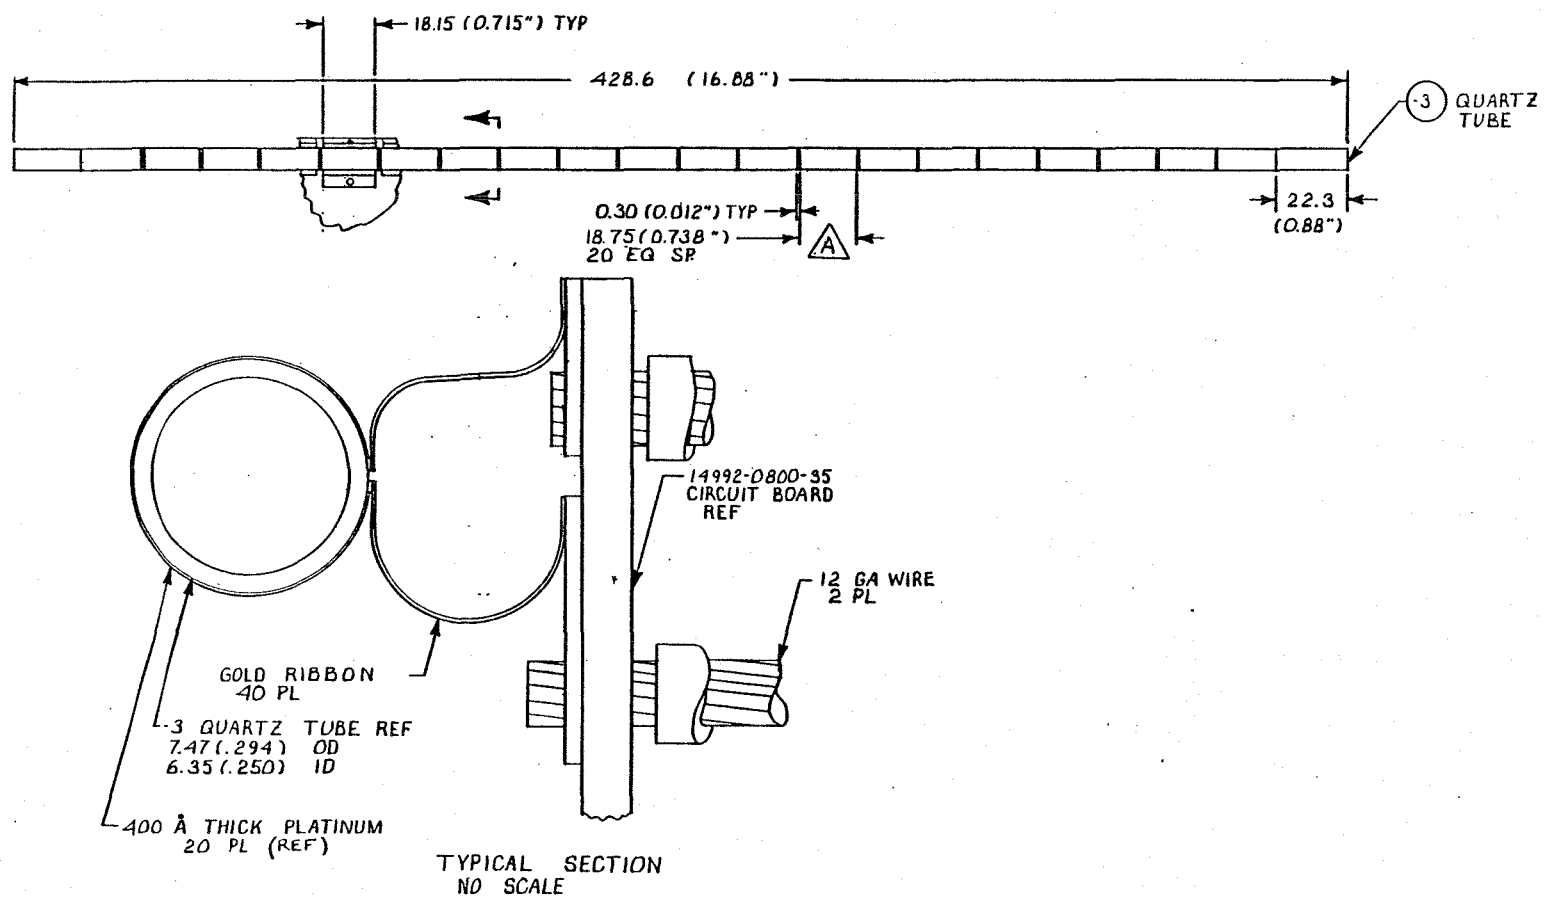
FLOW BOILING EXPERIMENT TEST SECTION HEATER DETAILS
